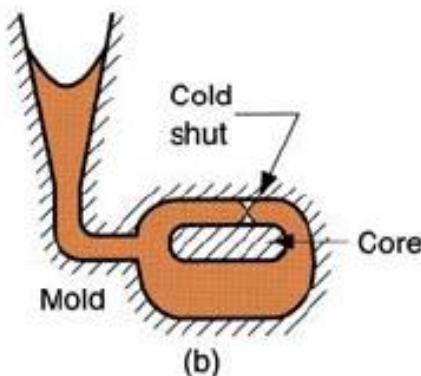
Some common defects in castings: (b) cold shut
